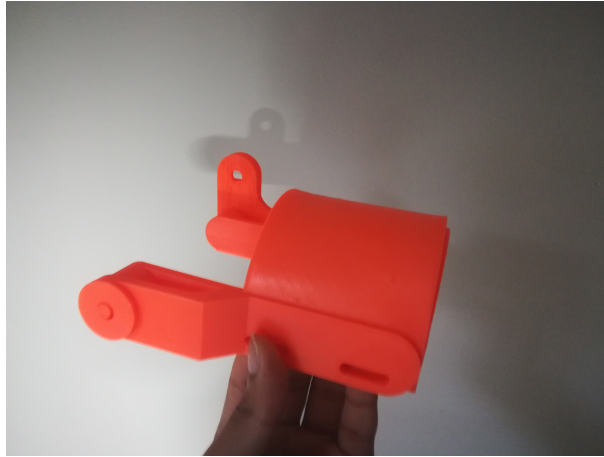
3D printed cuff fitting the jig. Both pieces are orange.
